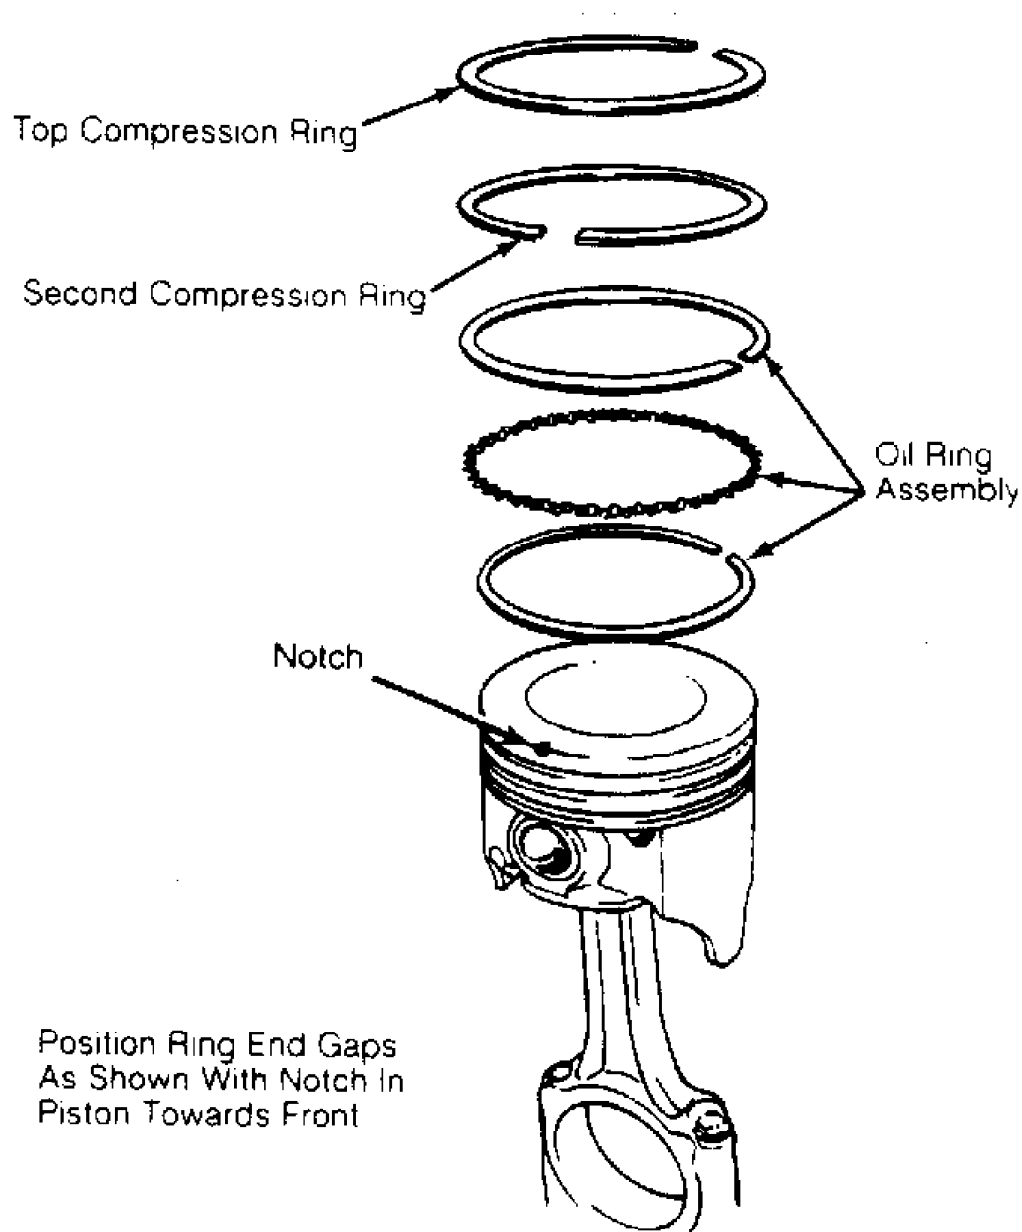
Typical Piston Ring End Gap Positioning - Typical
